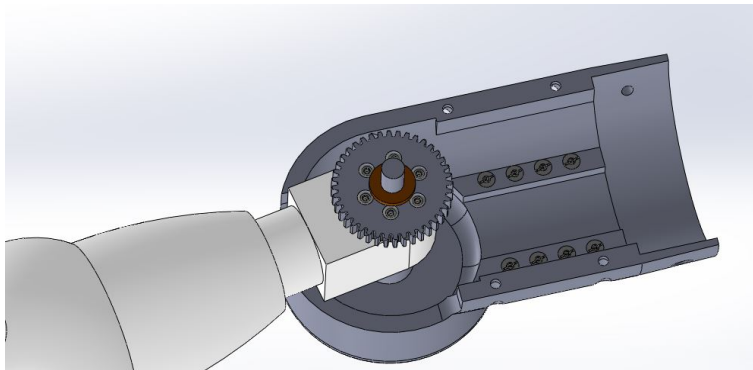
M2 threaded inserts pressed into holes in lower casing.
